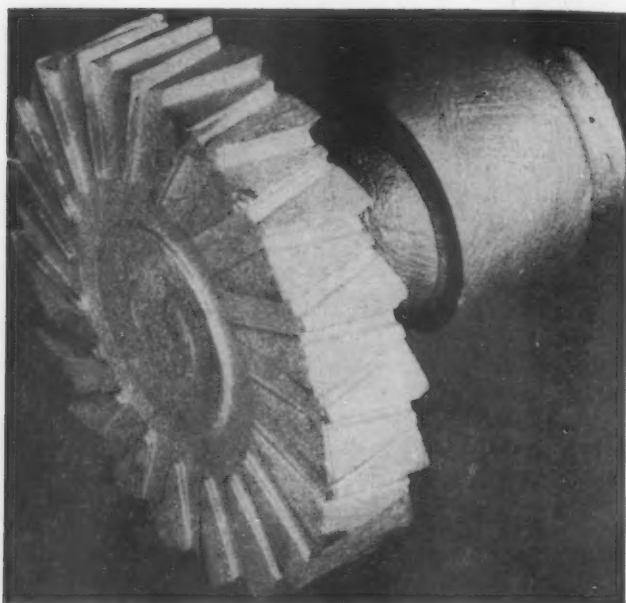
A STAGGER-TOOTH MILLING CUTTER CASTING SPUN IN GREEN SAND.
